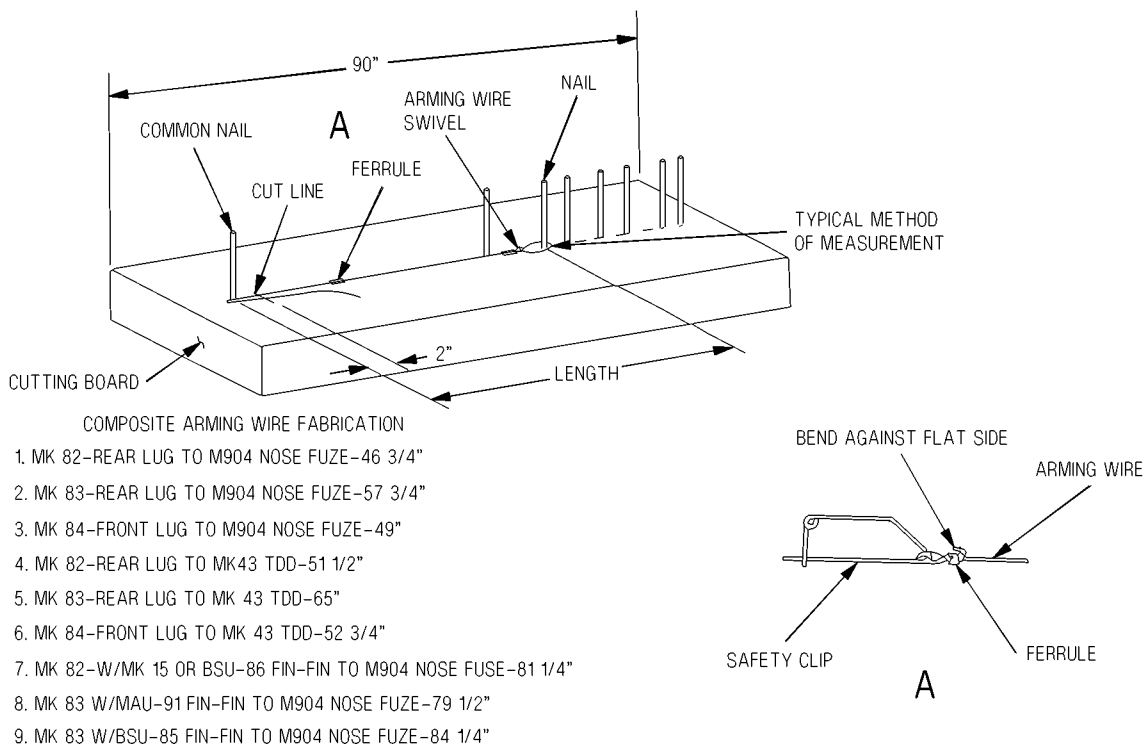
Arming Wire Installation (Sheet 2)
